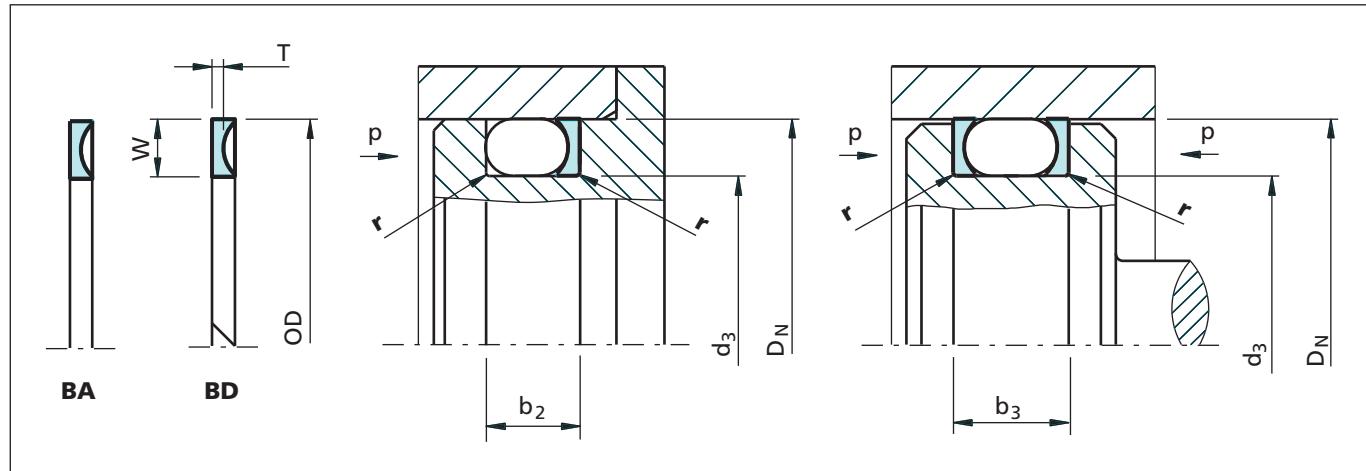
Installation drawing external sealing, concave Back-up Ring types
